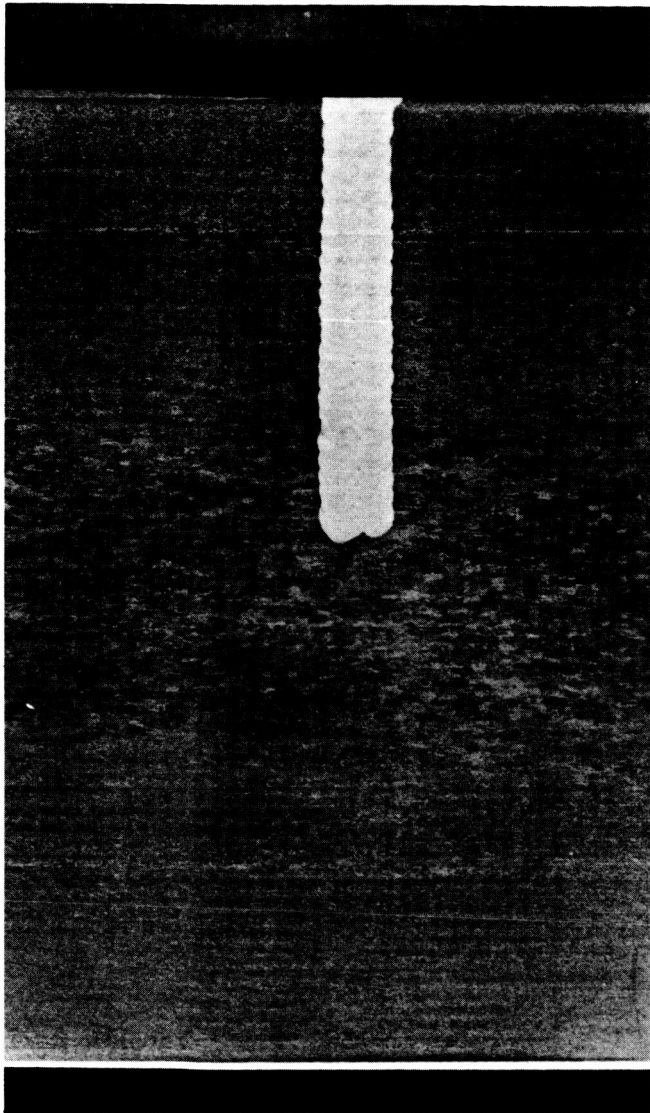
PARTIALLY COMPLETED WELD DEPOSITED VERTICALLY DOWN IN A 5-INCH-THICK PLATE (Plate V-7)
